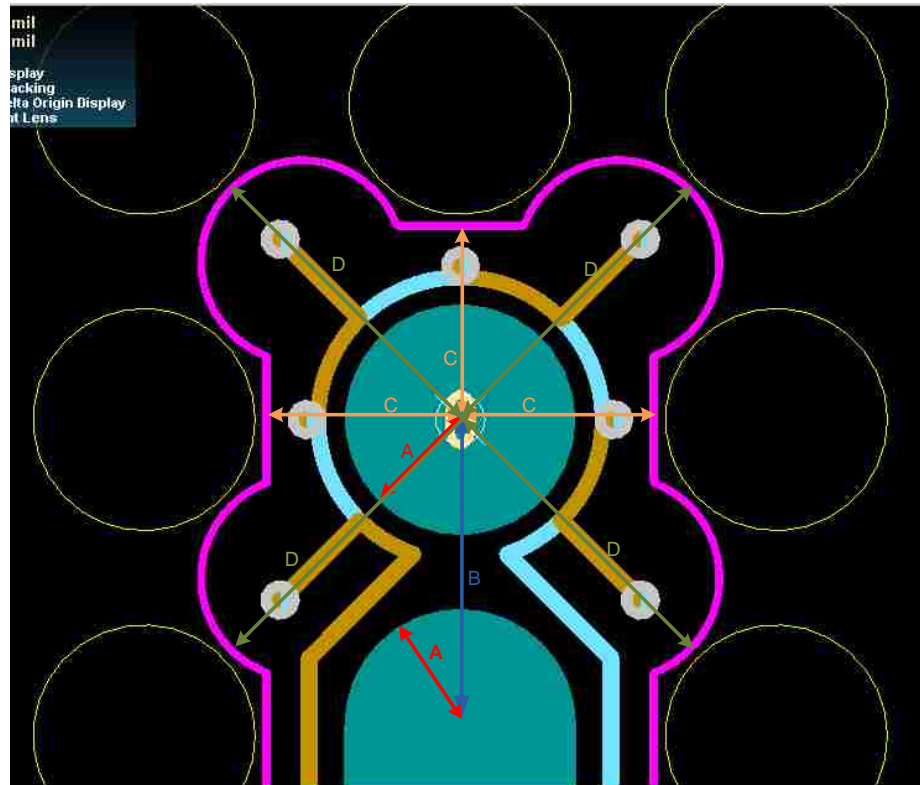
Enlarged View of the BGA Probe Tip Area
